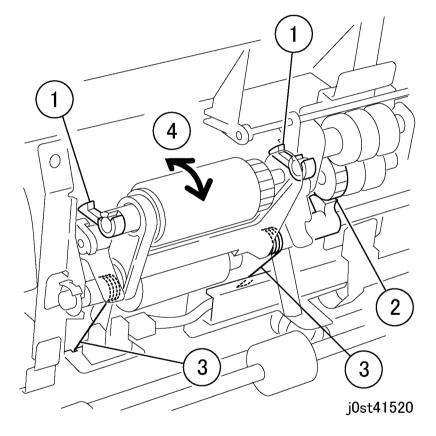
Installing the Nudger/Feed Roll Assembly (j0st41520)
